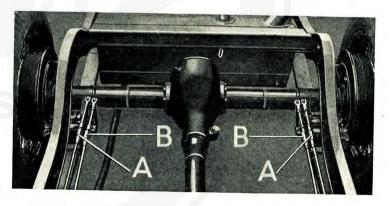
Showing Brake Rods and Adjusting Nuts to Rear Wheel Brakes, The Hand Brake Adjusting Nuts are marked "A"; the Foot Brake Adjusting Nuts " B."
